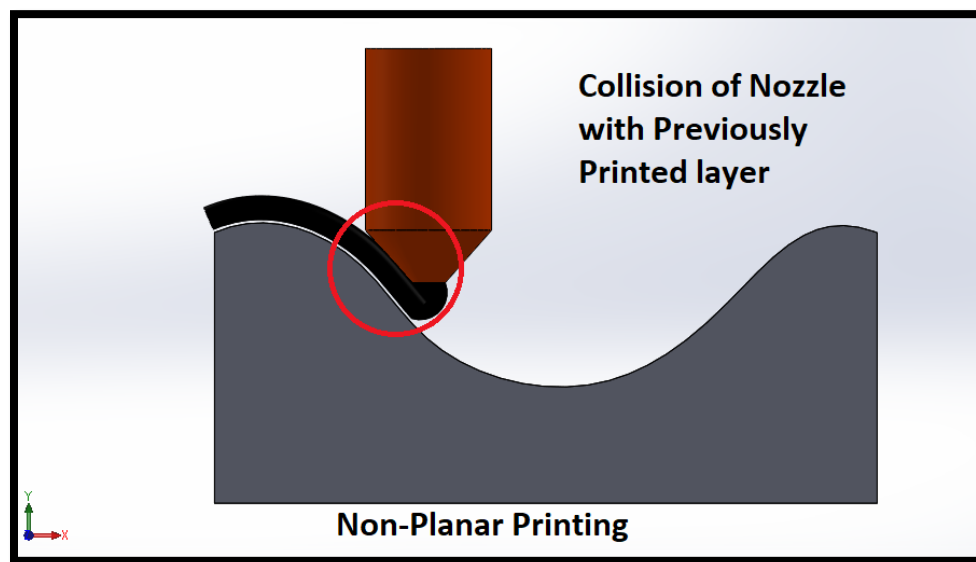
Nozzle Collision While Printing Non Planar Layers On A 3-Axis Machine
